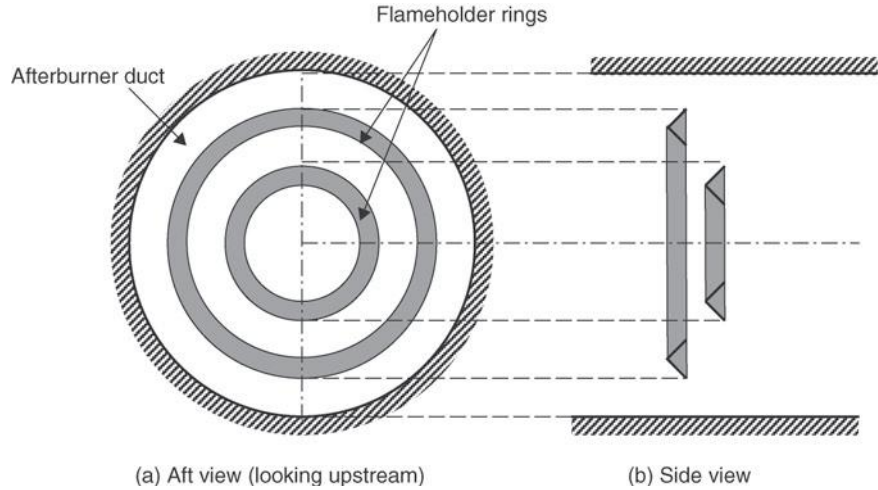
serves as a definition sketch for the afterburner duct, and the flameholder rings that contribute to the blockage parameter B . Here the radial gutters that connect the V-gutter rings to the turbine exit diffuser cone or the casing are not shown. The EJ200 of Eurojet Consortium uses radial gutters (instead of rings) for flame holding (Figure 7.47).
